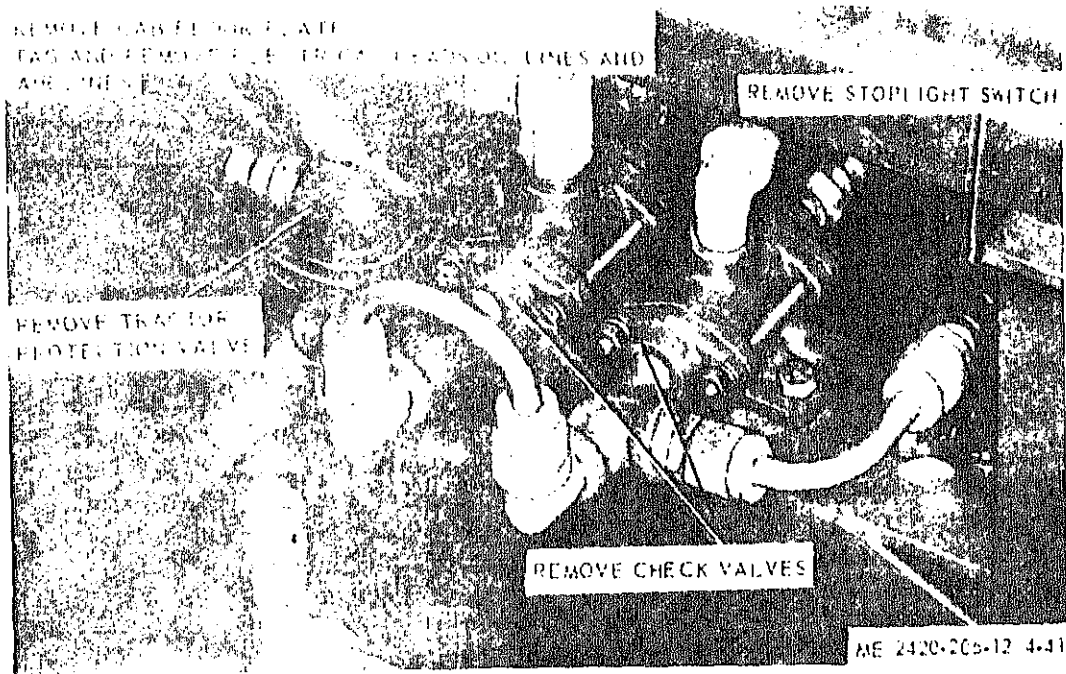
Check and protection valves and stoplight switch, removal and installation.
